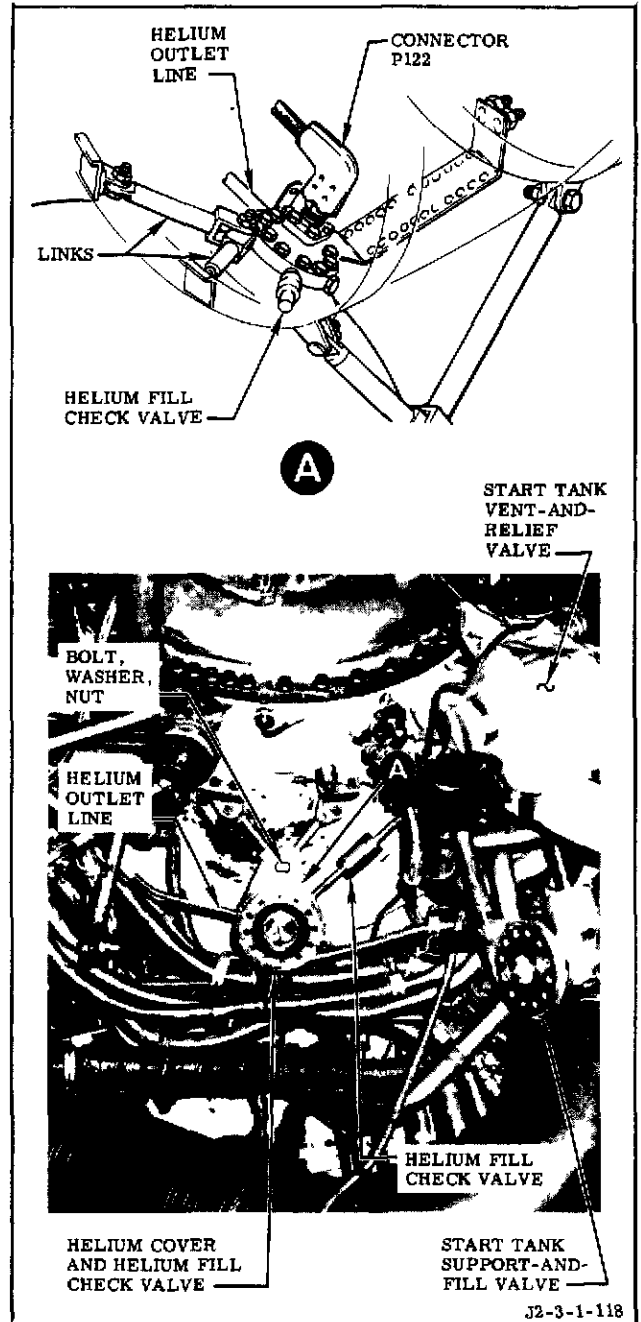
Helium Cover and Helium Fill-Check Valve
